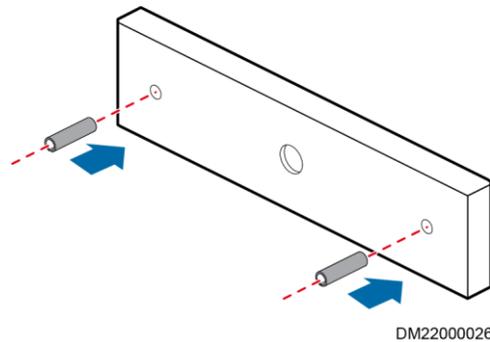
Installing the mounting plate of the magnetic lock cover
